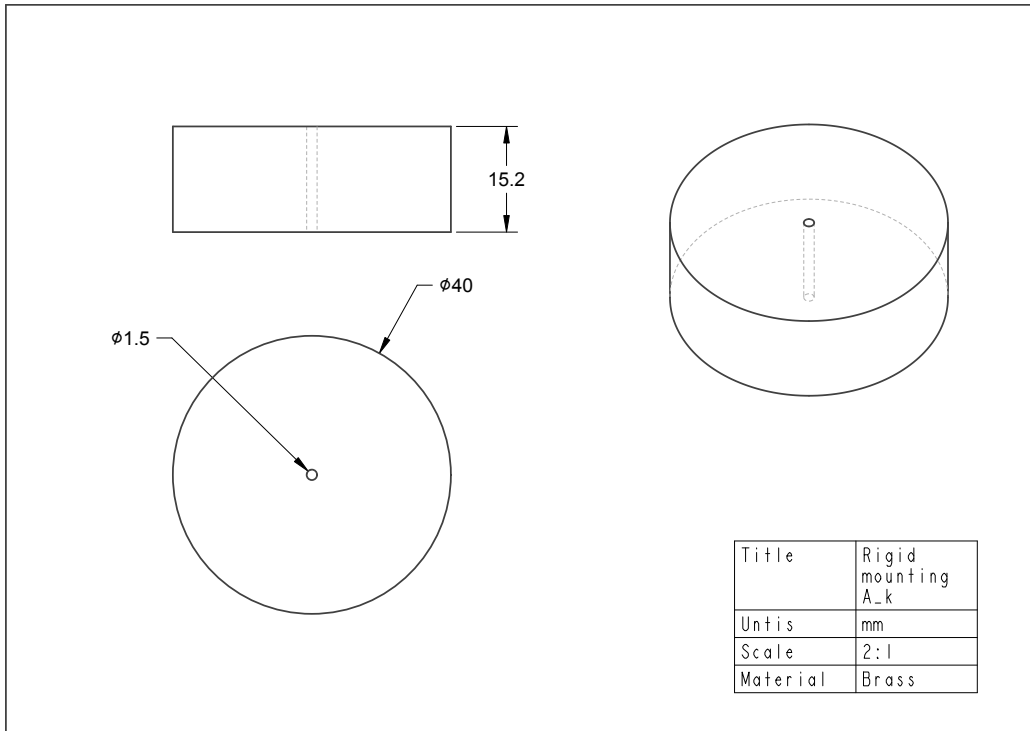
Technical drawing of Rigid Mounting Solution for  $\mathcal{A}_k$ .
